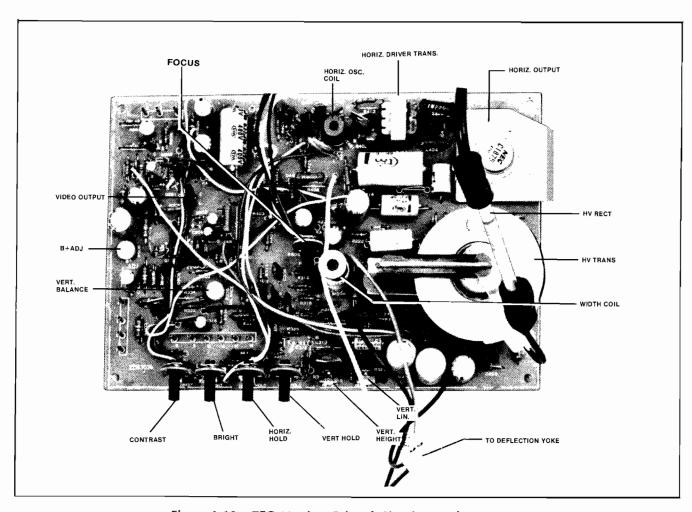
TEC Monitor Printed Circuit Board, Top View
